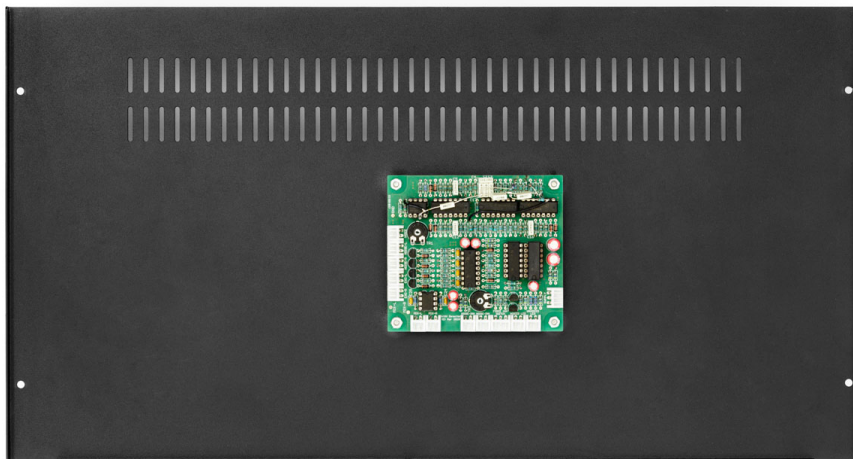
The V/UV detection board mounted onto the inside face of the bottom cover.
